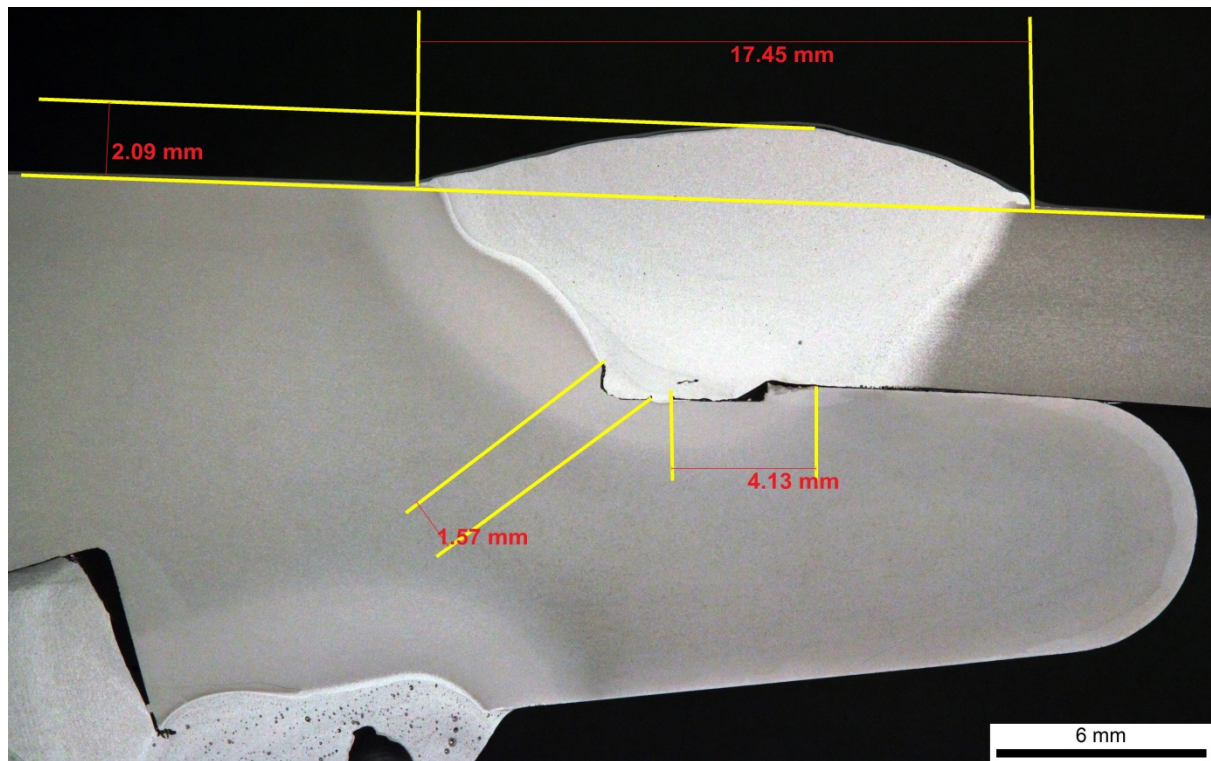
J3564 sample W07-08, slice 7, right hand side of Figure I93. Lack of side wall fusion root defect present. Large gas pore in fillet weld joining extrusion band to bulkhead.
